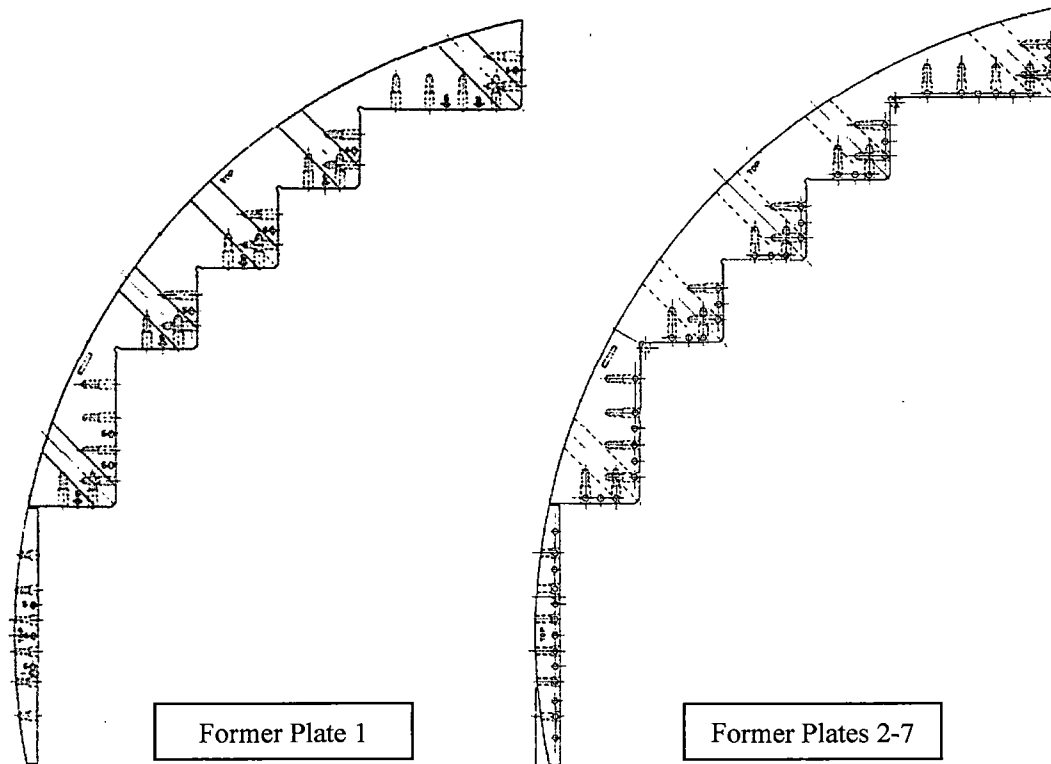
Westinghouse 3 Loop Standard Upflow Plant Former Plates
